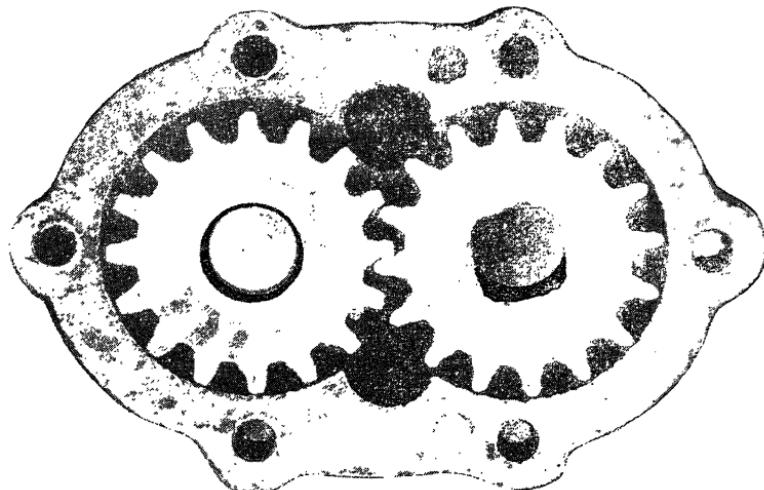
Photograph of Badly Worn Set of Gears in a Gear Pump
